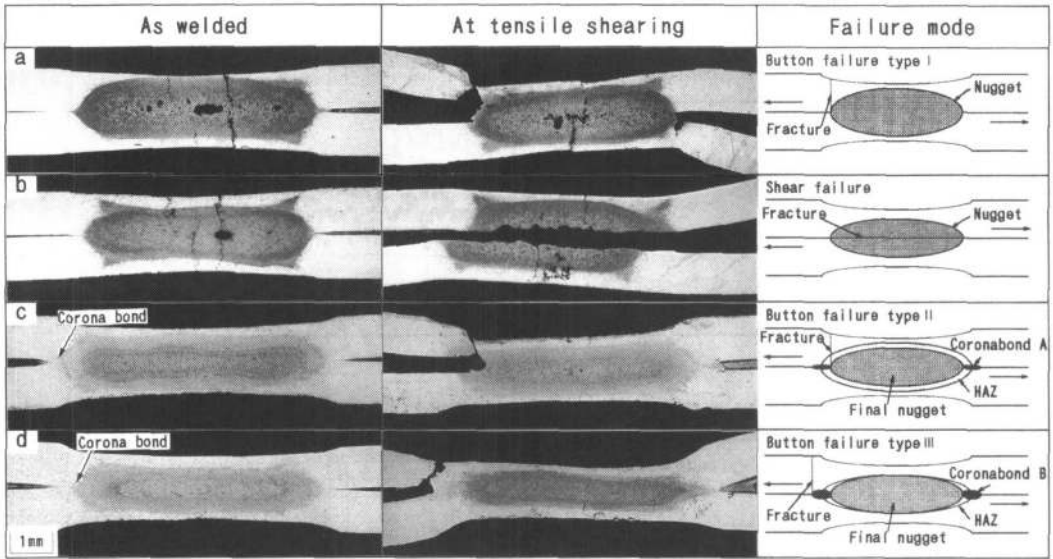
Cross section of weld and classification of failure mode.
